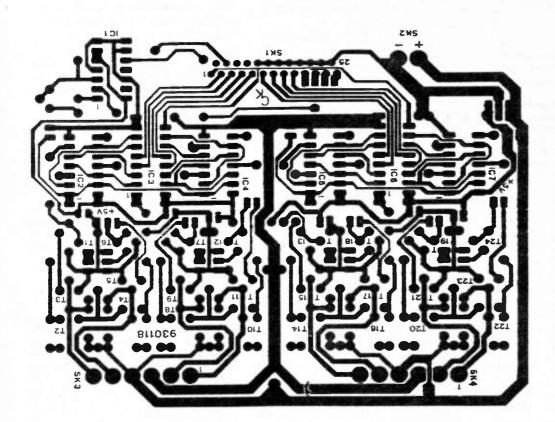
P.C.B. Layout and wiring for the Dual Stepping Motor Driver.
